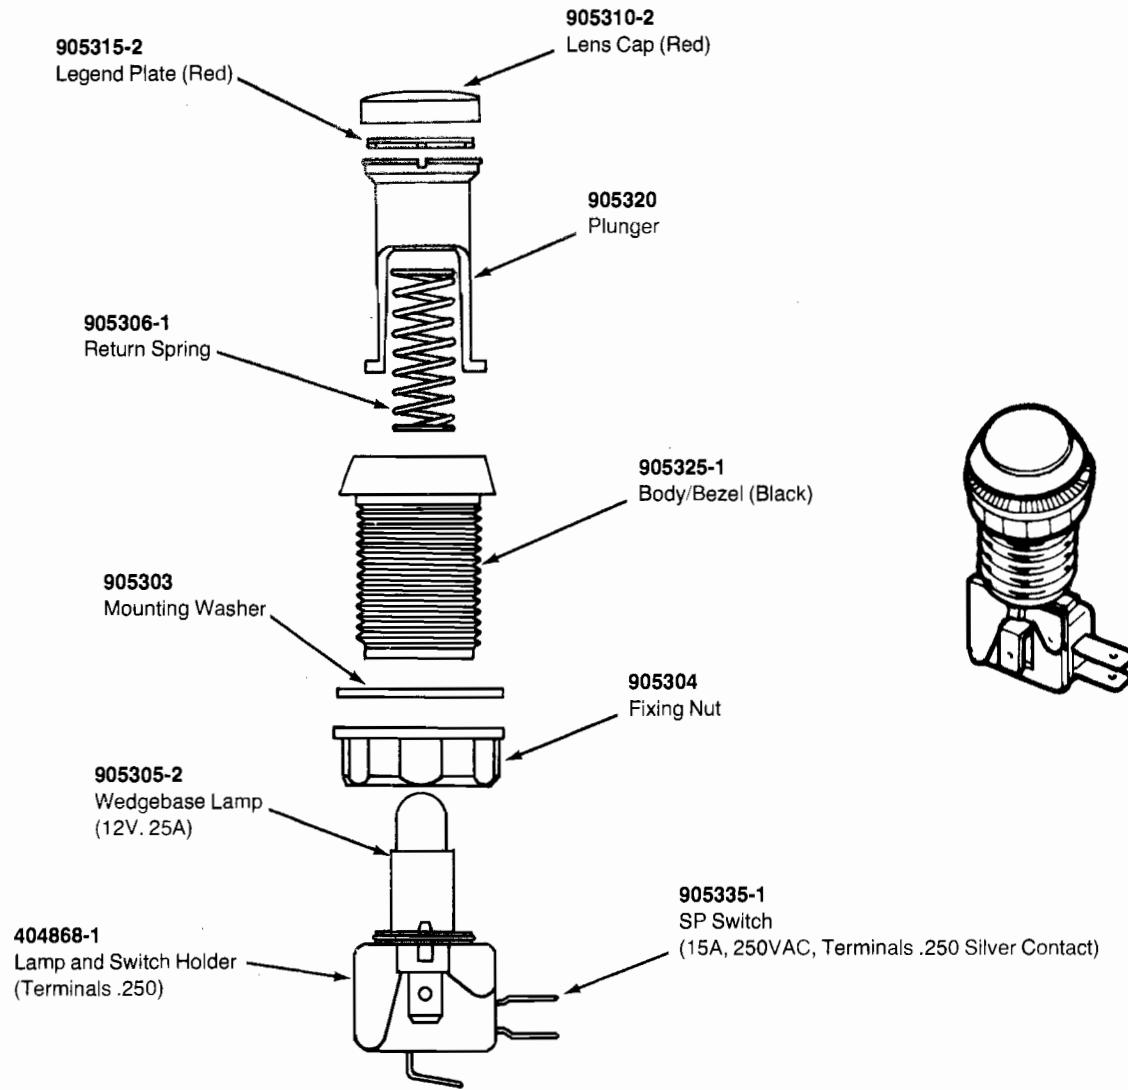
Coinco Switch Assembly (570-0039-01)
